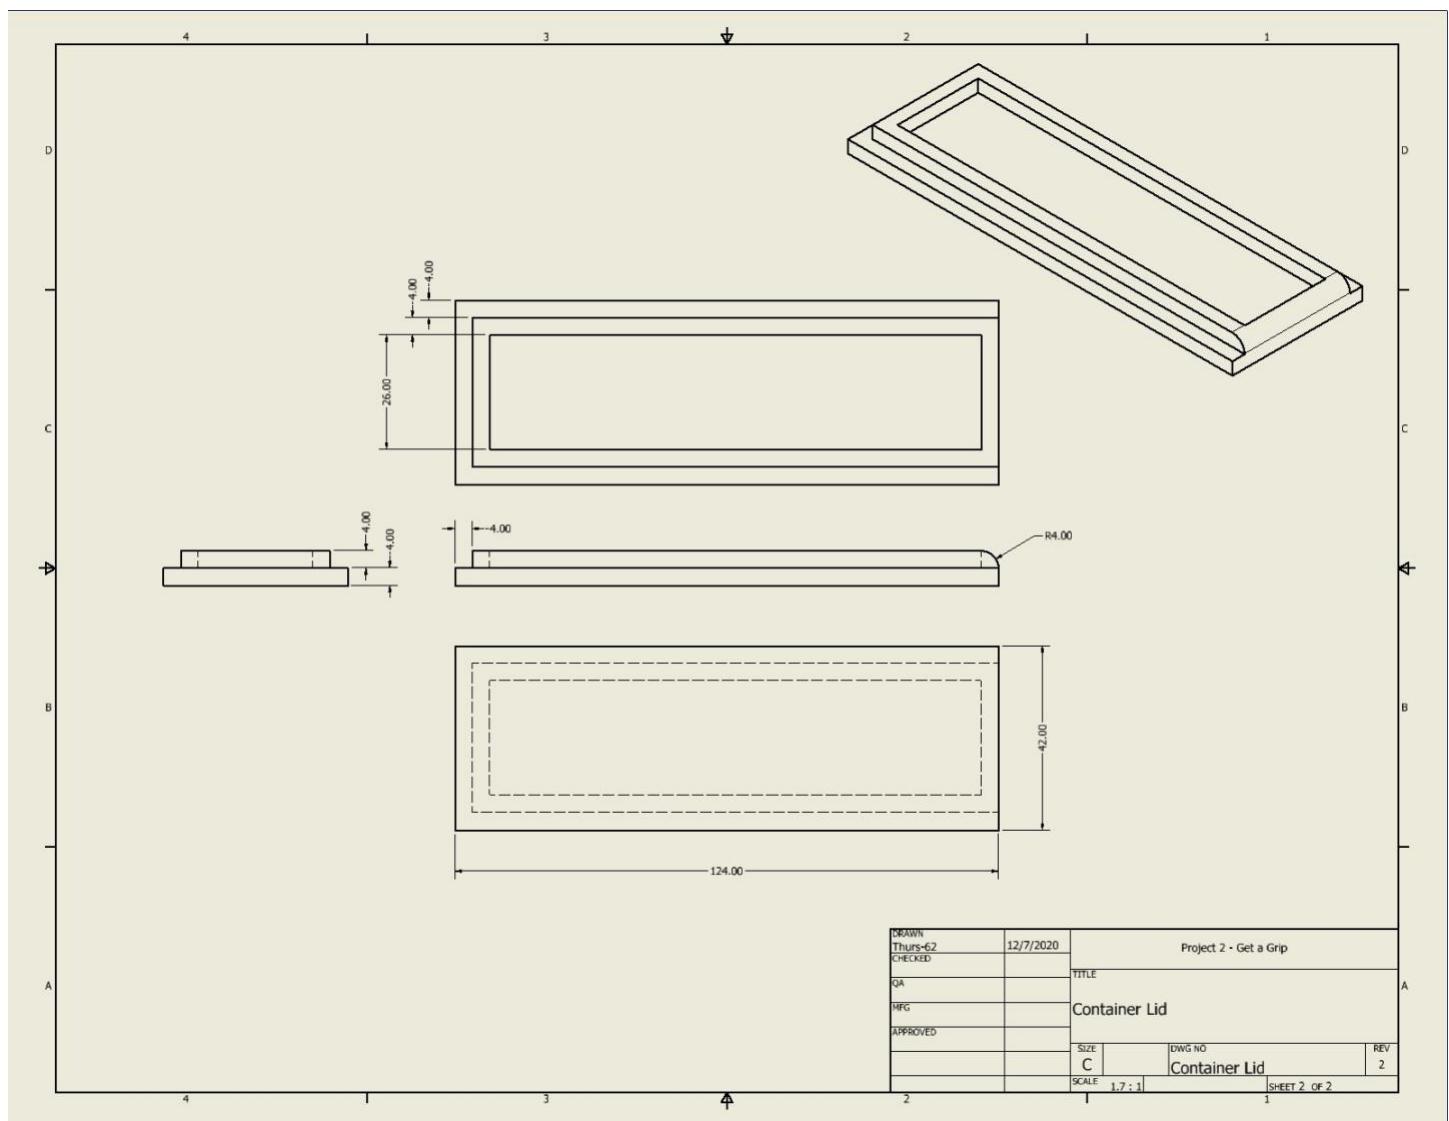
Fully-dimensioned Engineering Drawing of lid design
